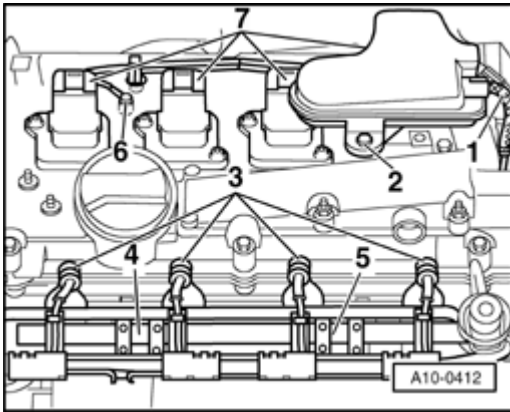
Identifying Vacuum Pipe, Vacuum Reservoir, Connectors, Support Bar & Ground Wire
